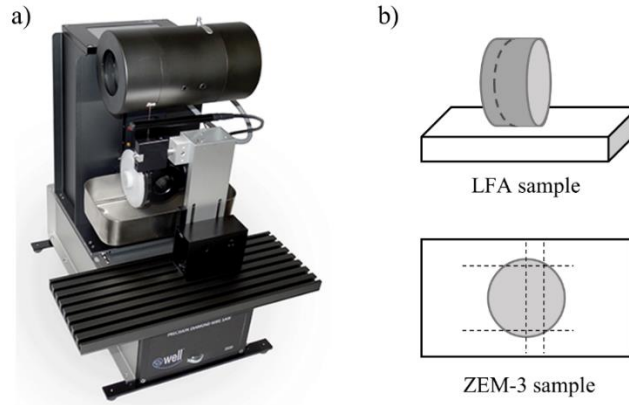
a) Diamond wire saw cutting device (b) cutting directions of samples.
